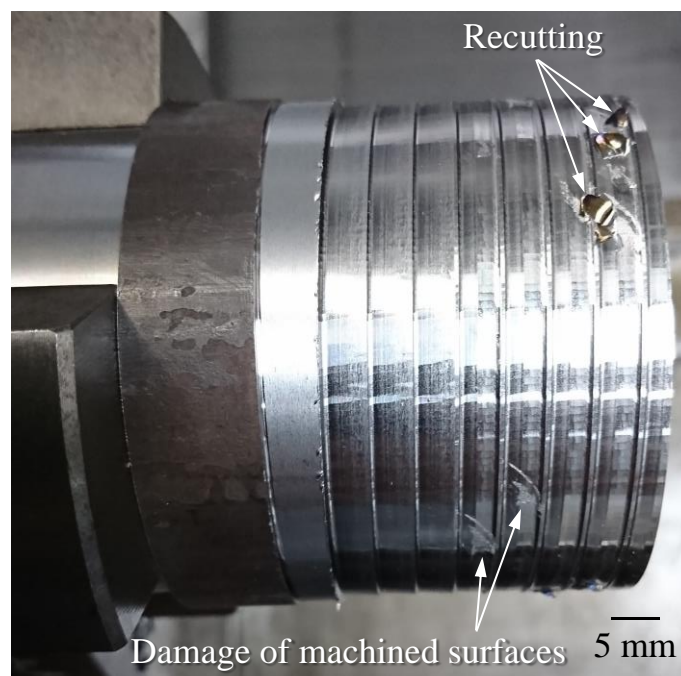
Machined surface state after orthogonal turn-milling of ISO C45.
